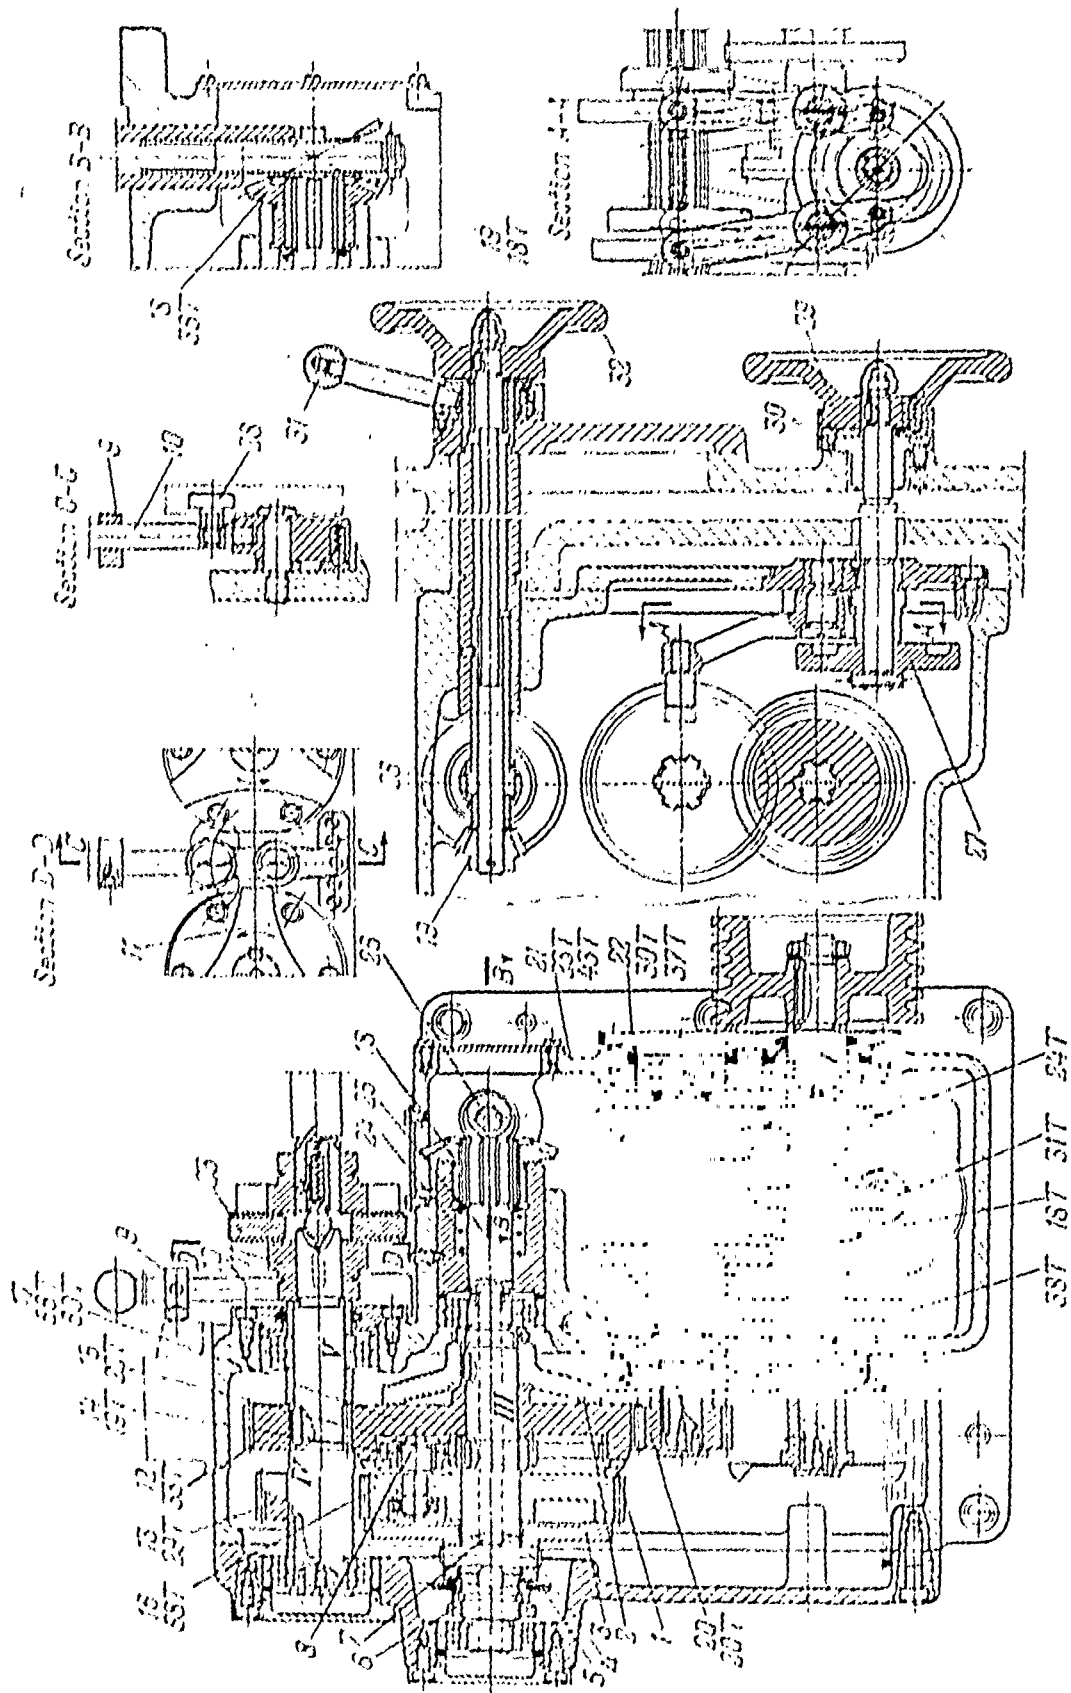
Spindle drive reducing gear in the model 5A935 thread-rolling machine
